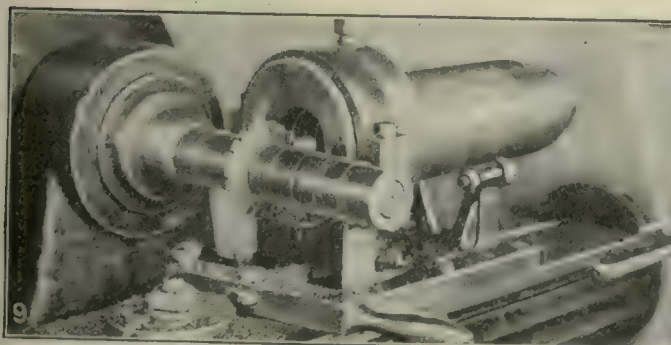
NOTCHING THE BASE ON A HAND MILLER
